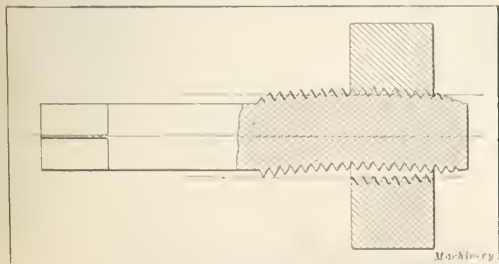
Threaded Portion of Tap is bent, which results in producing an Oversize Hole
